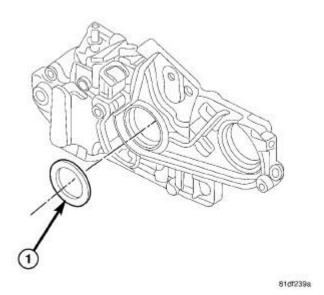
Front Crankshaft Oil Seal Courtesy of CHRYSLER LLC
